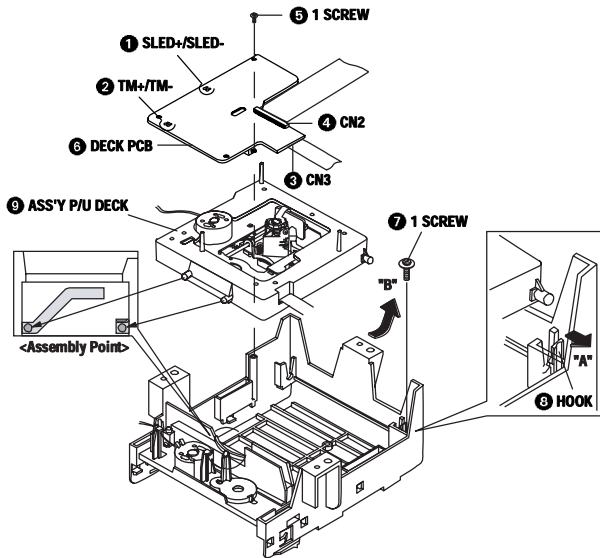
Removing PCB Deck Assembly, P/U Deck
